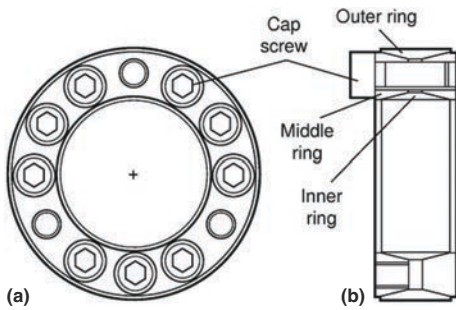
Tapered-ring locking device assembly, (a) plan view, (b) cross section
